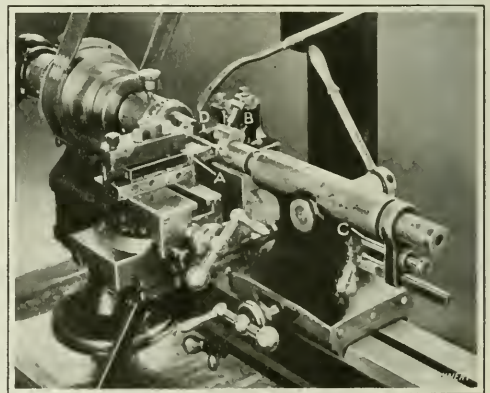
View of the Bench Lathe Set-up used in making Taper Points for Dial Gages
